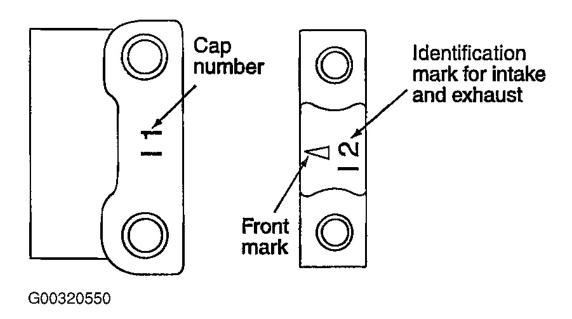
Illustrating Bearing Caps Identification Marks Courtesy of KIA MOTORS AMERICA, INC.
